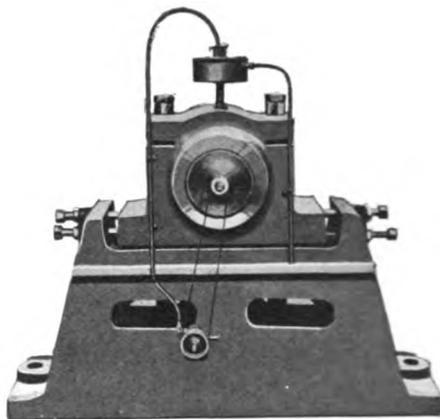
Hornsby Outer Bearing and special Oiling Device.
